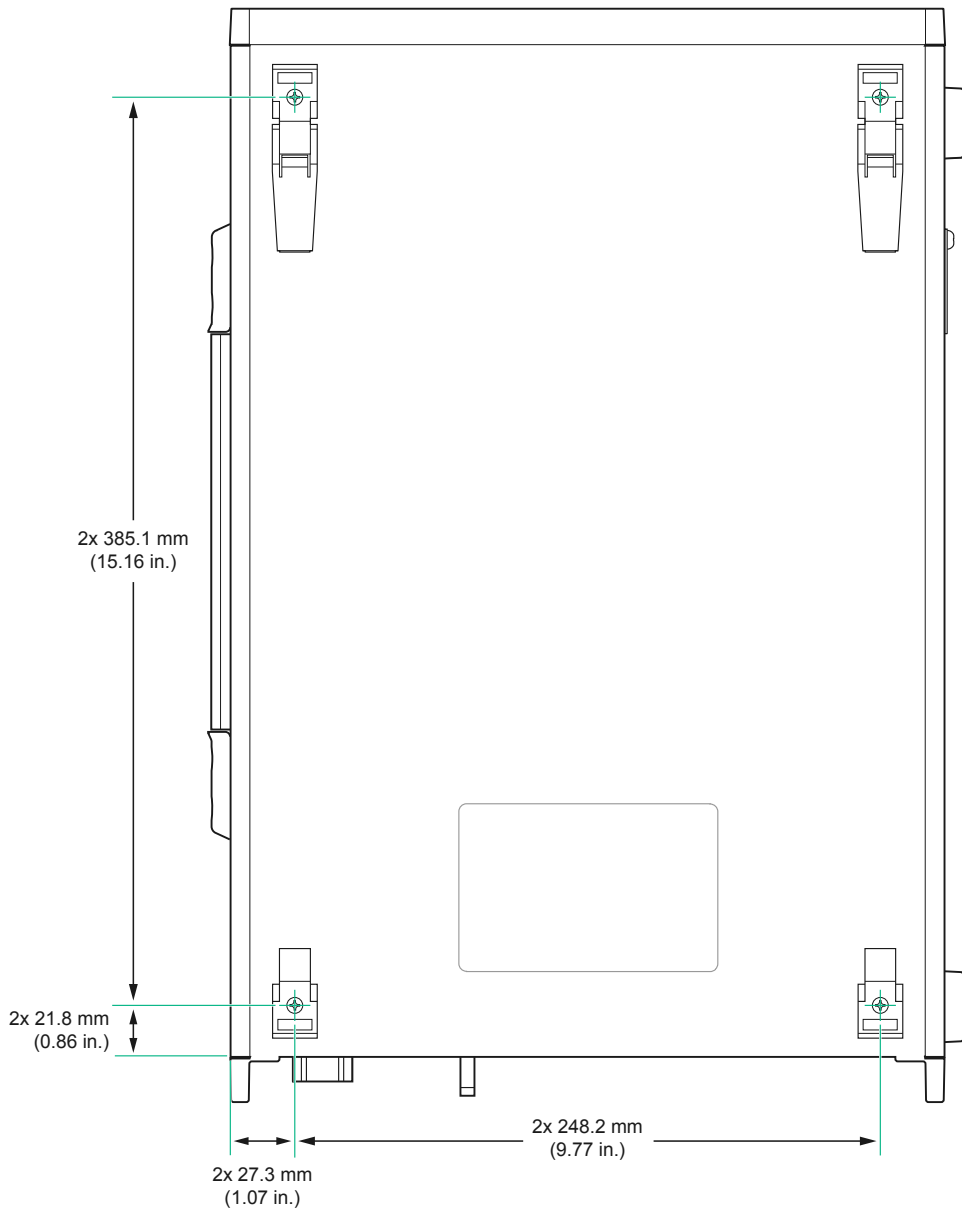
PXIe-1092 Chassis Dimensions (bottom)
